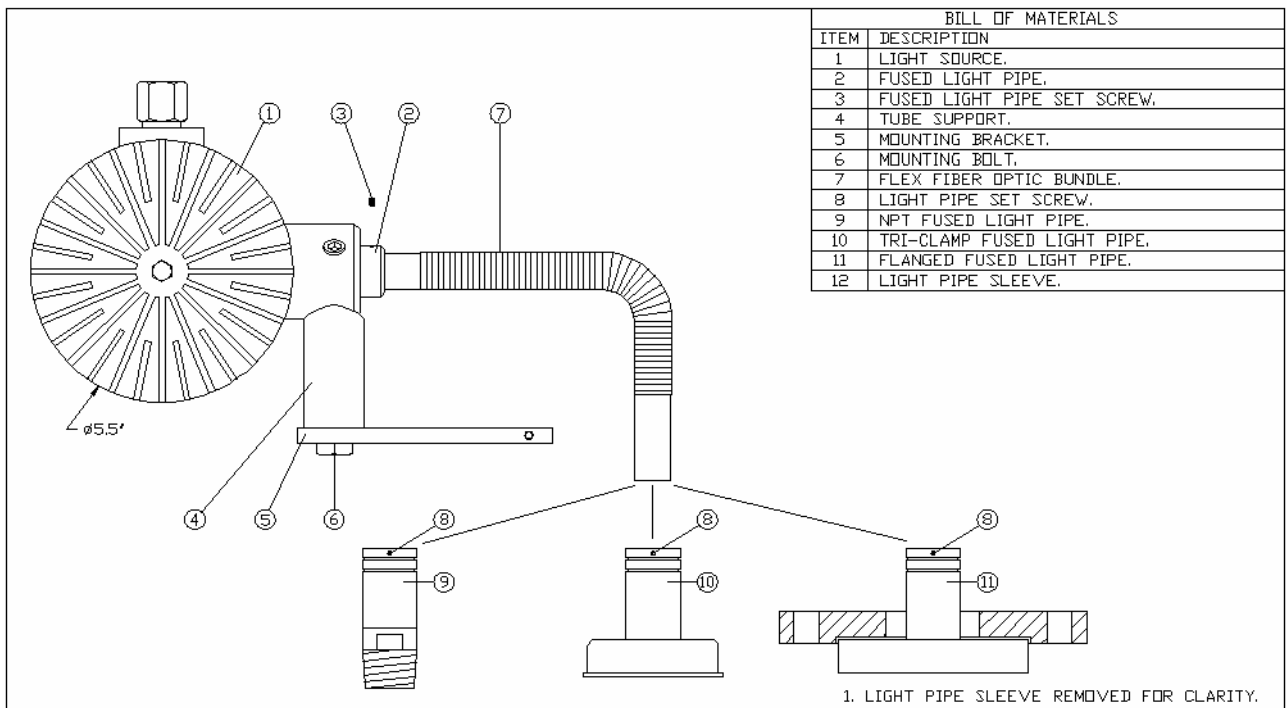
Flexible Bundle Mounting Illustration - NPT, Tri-Clamp or Flange Connections
